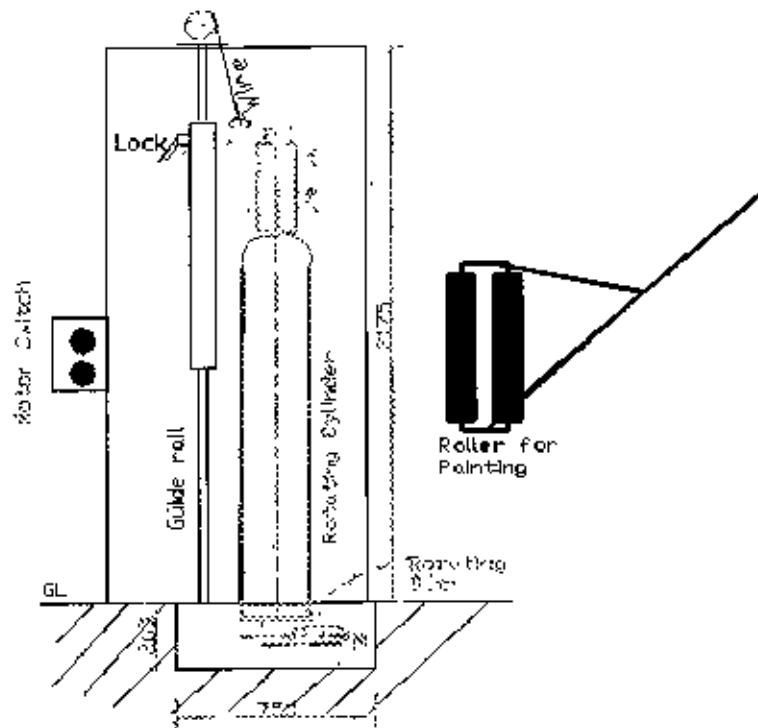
Cylinder Painting Machine-Semi-Automatic
